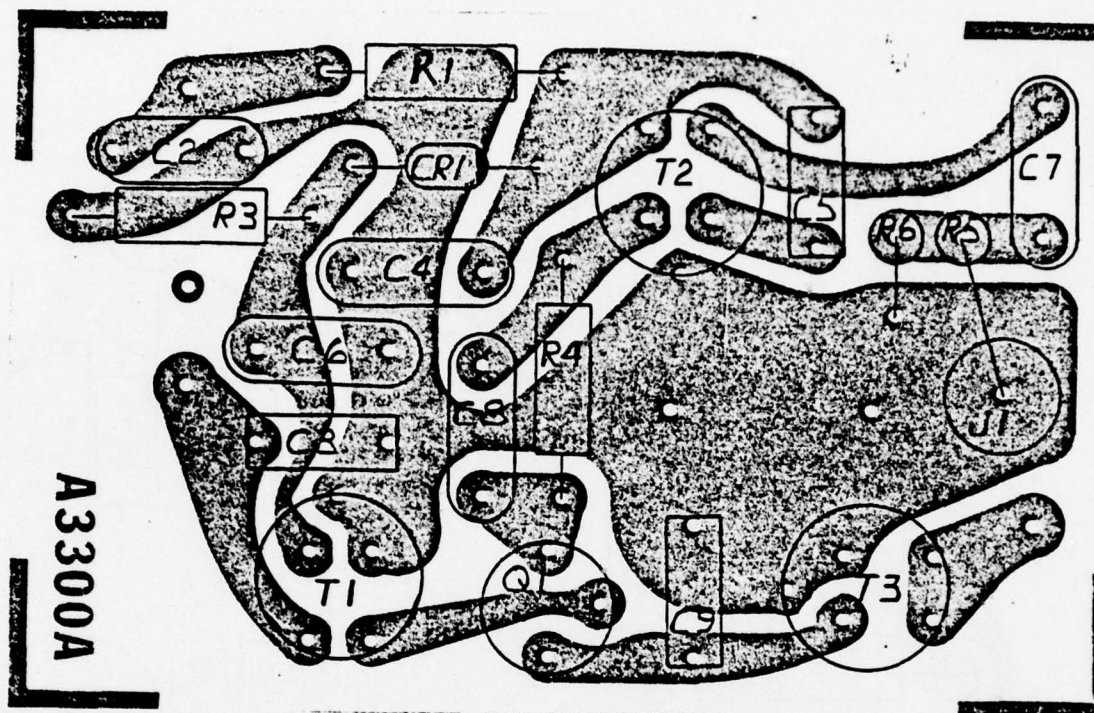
P.C. BOARD LAYOUT FOR THE A3300A CRS
